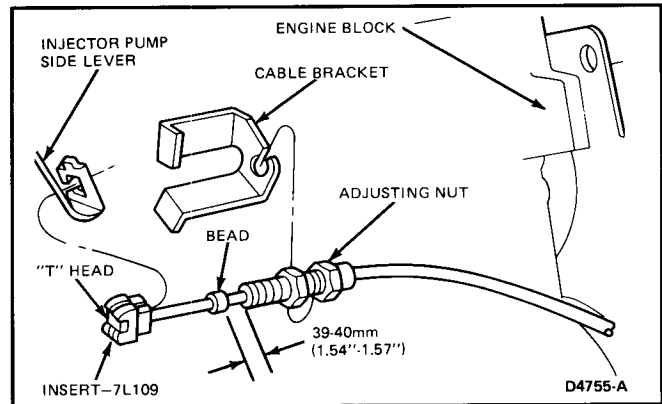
Kickdown (TV) Cable (In Engine Compartment)—Exploded View
